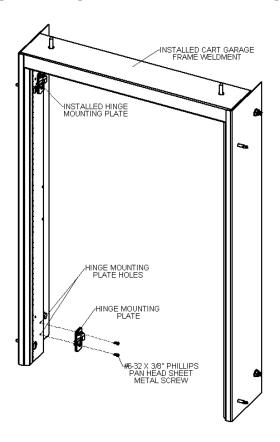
Hinge Mounting Plate Installation (Left Hinged Door Shown)
